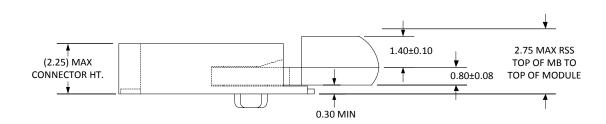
H2.3-S3 - Stack-up Top Mount Single Sided Module for 1.50 Maximum Component Height
